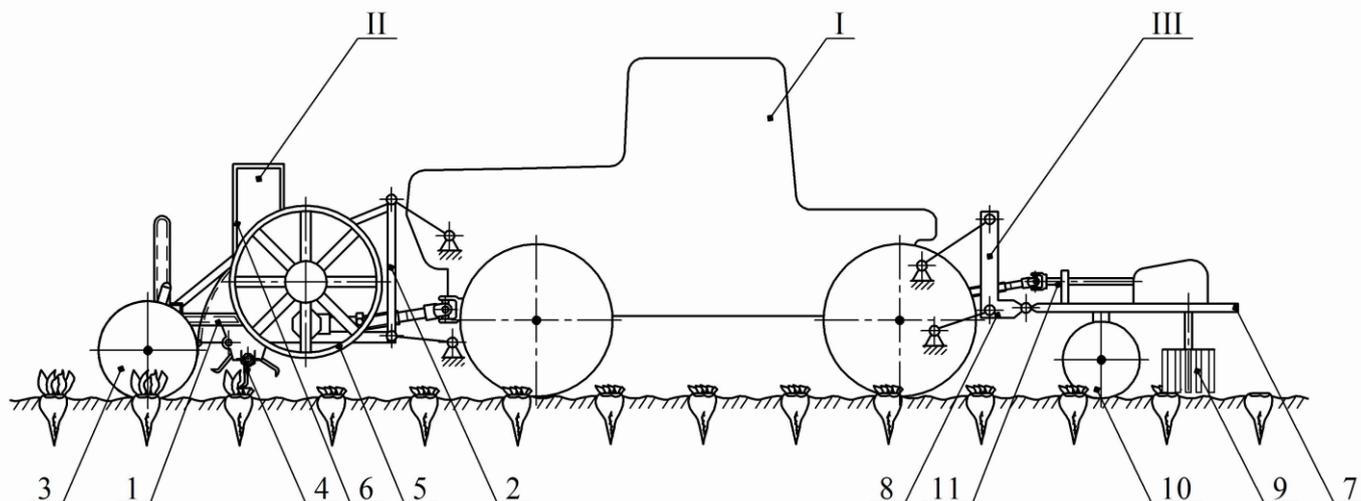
Combined machine-tractor aggregate for the harvest of the sugar beet heads:
